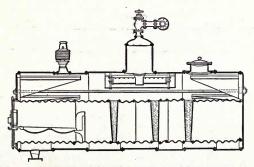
Cornish boiler, with corrugated furnace-tube, fitted with Galloway-tubes.
